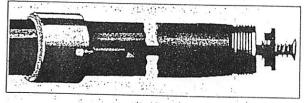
Cab-Over-Engine Steering Gear Wormshaft
